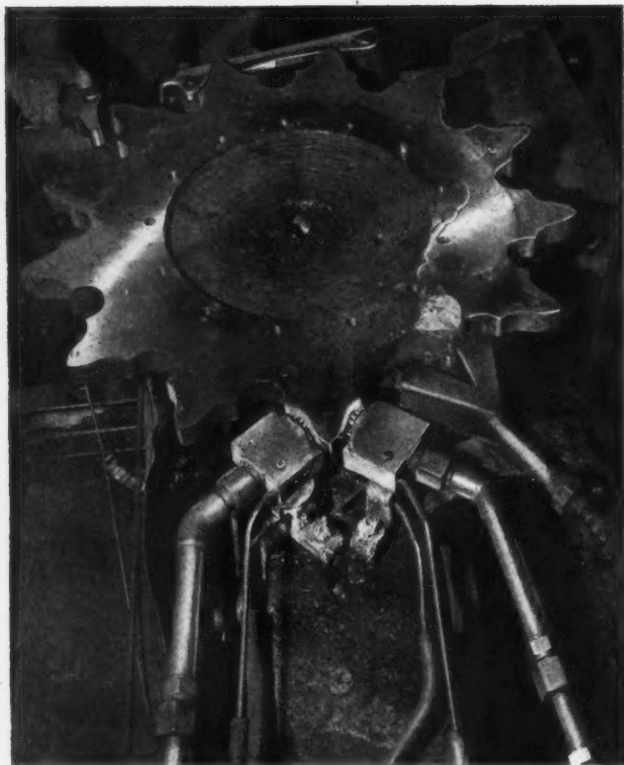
View Showing the Application of Torches and Quenching Head on Machine Illustrated in Fig. 9
